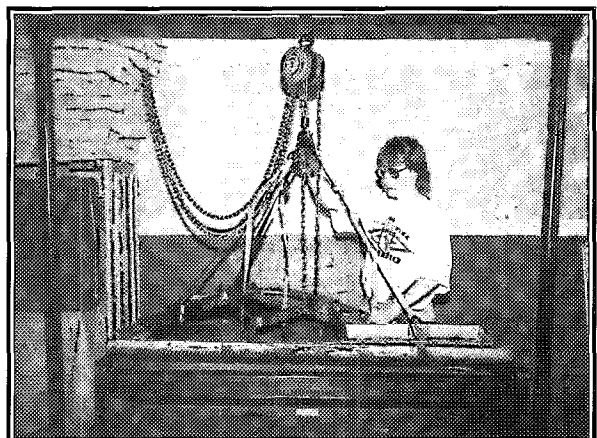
Hoisting out the plate. Plate flange has cleared the stretcher.
